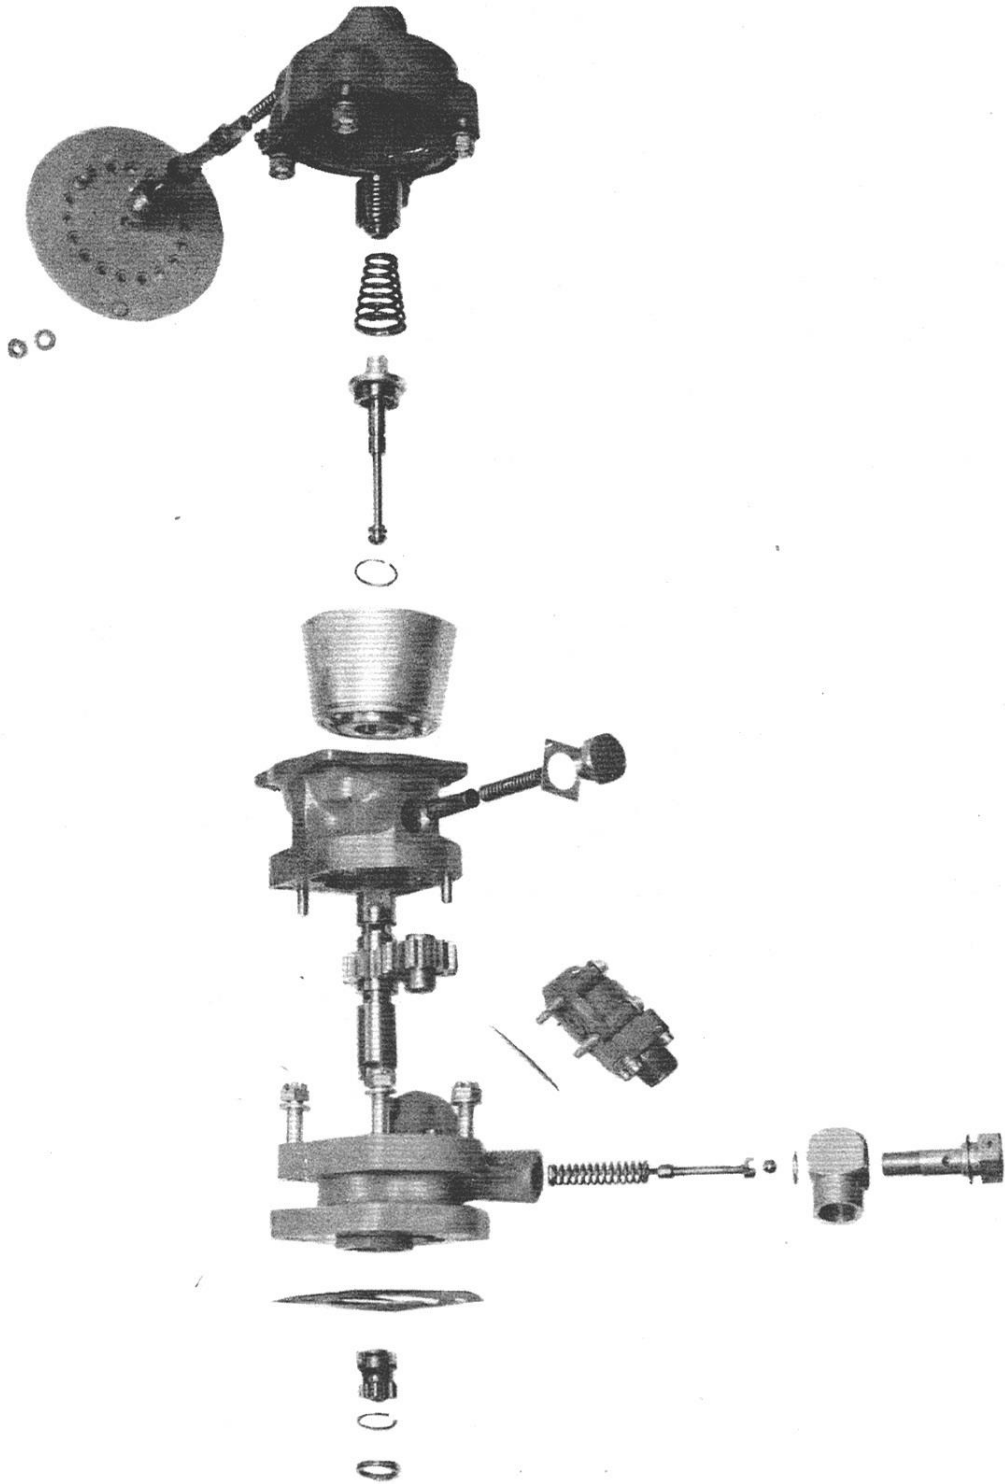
EXPLODED VIEW — MODEL 4K11-BOJ HYDRO-MATIC GOVERNOR
